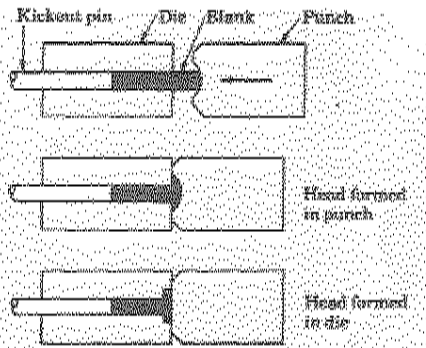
Forming heads on fasteners such as bolts and rivets. These processes are called heading.
